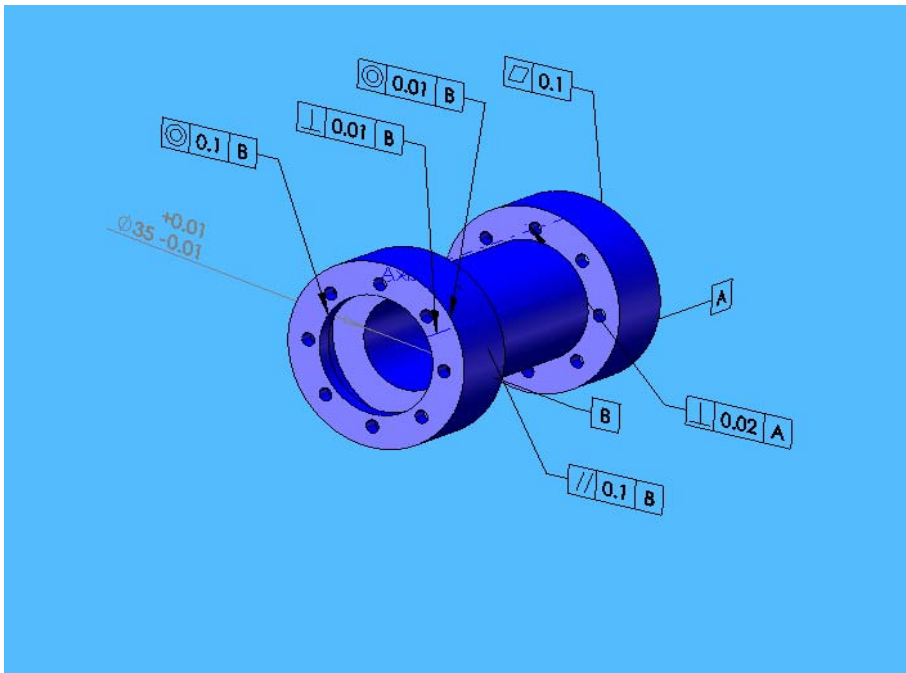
Dimensional and geometrical tolerances for the workpiece
